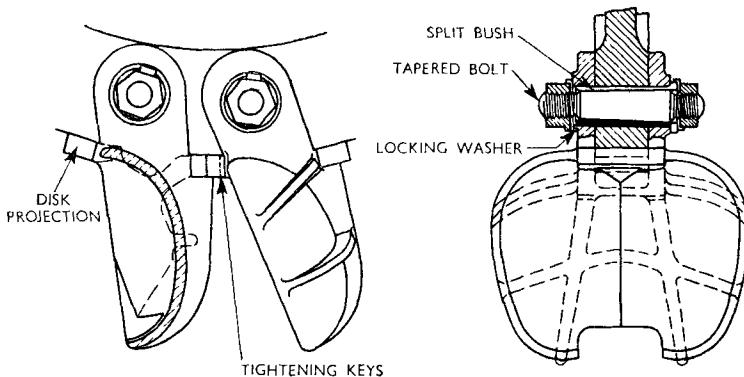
Method of Attachment of Impulse Wheel Buckets
